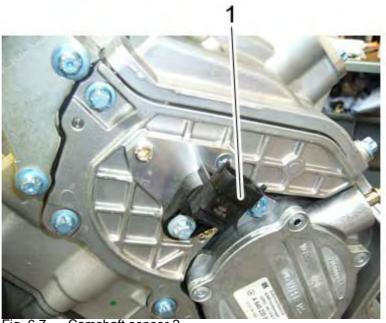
Camshaft sensor 2 1 Camshaft sensor 2 FADEC B (2 of 2)
